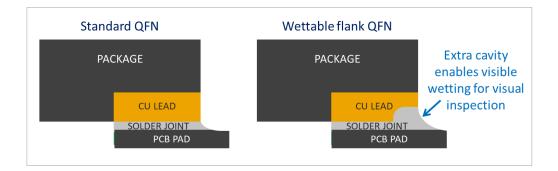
SiTime offer wettable flank-pated QFN packages for automated visual inspection
